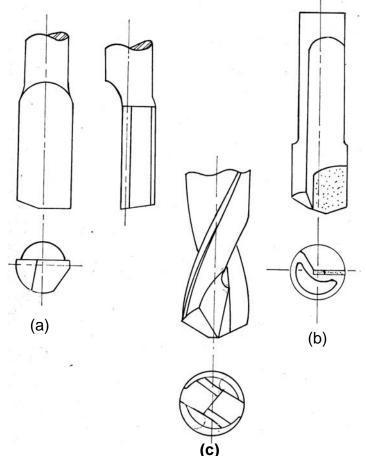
Schematic views of (a) half round drill, (b) gun drill and (c) crank shaft drill
